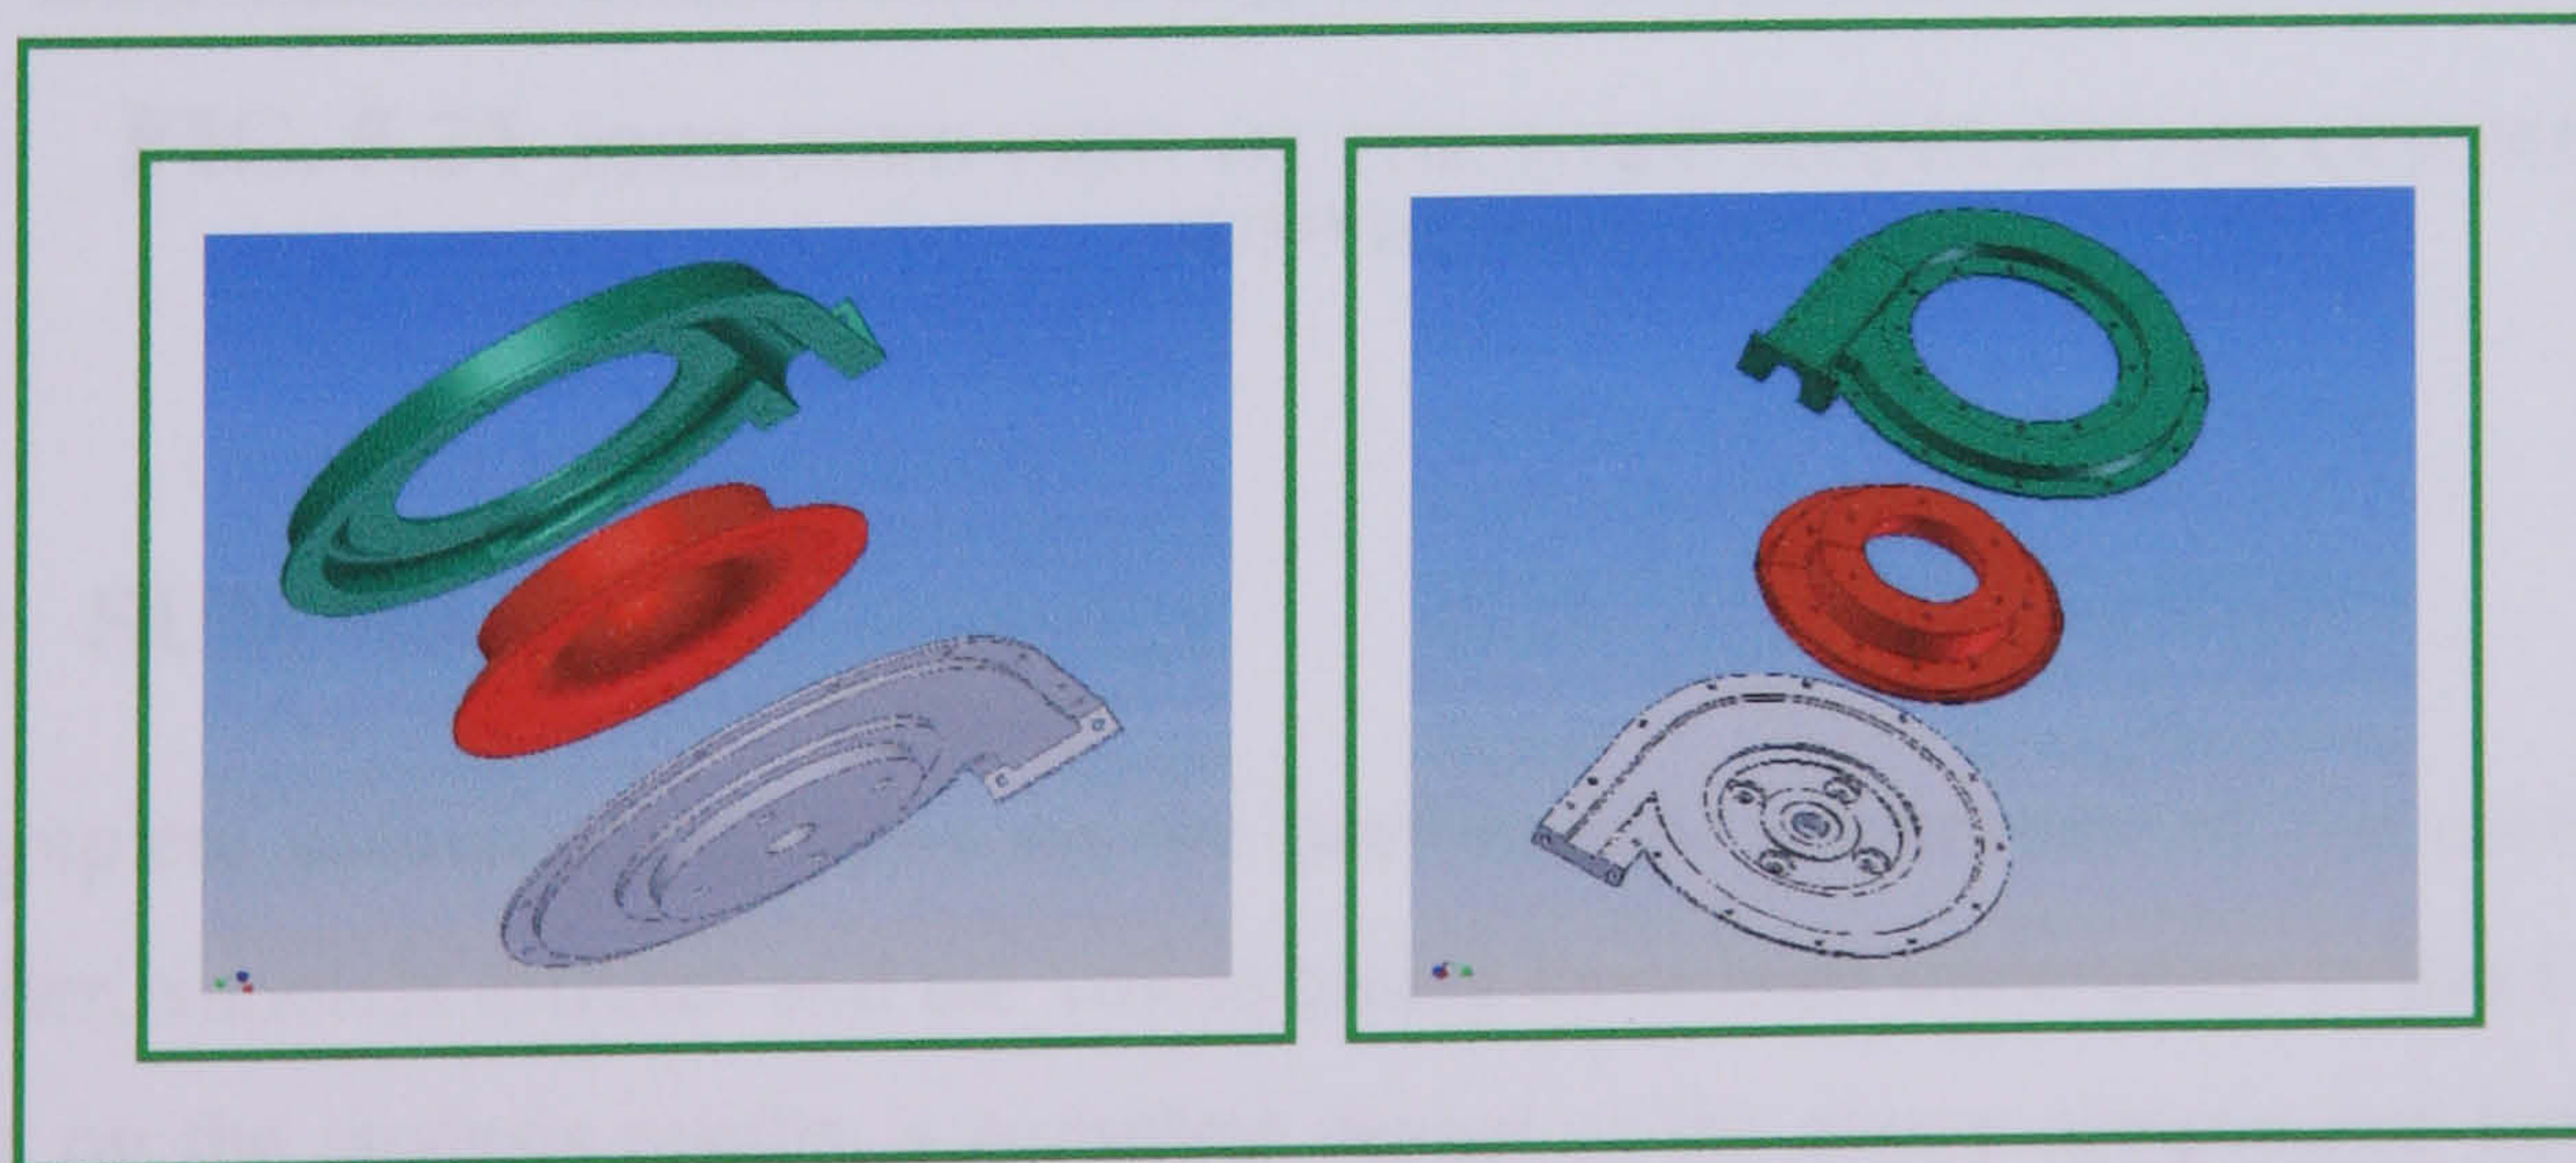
EXPLODED VIEW OF SOLID MODEL OF THE CENTRIFUGAL COMPRESSOR CASING ASSEMBLY
